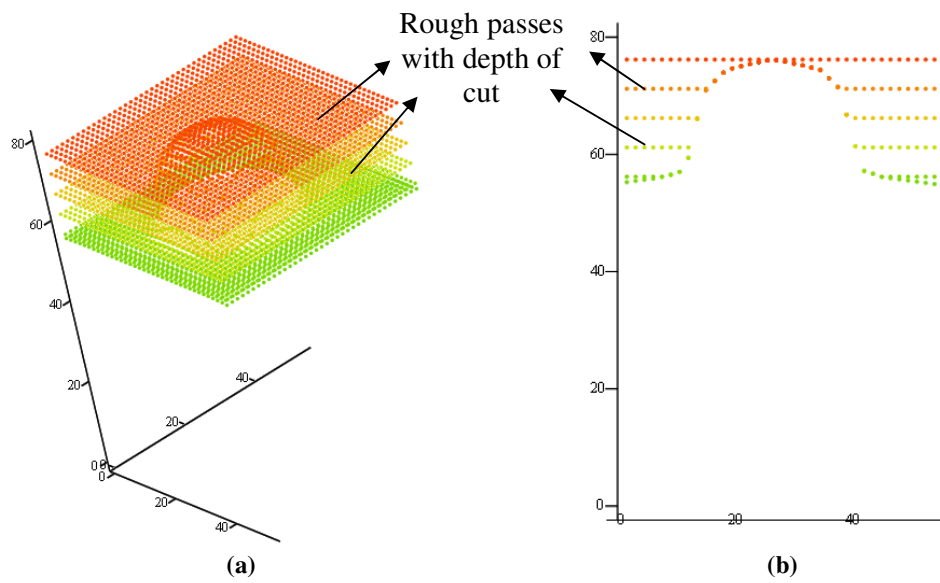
(a) Roughing passes with depth of cut (b) sectional view
